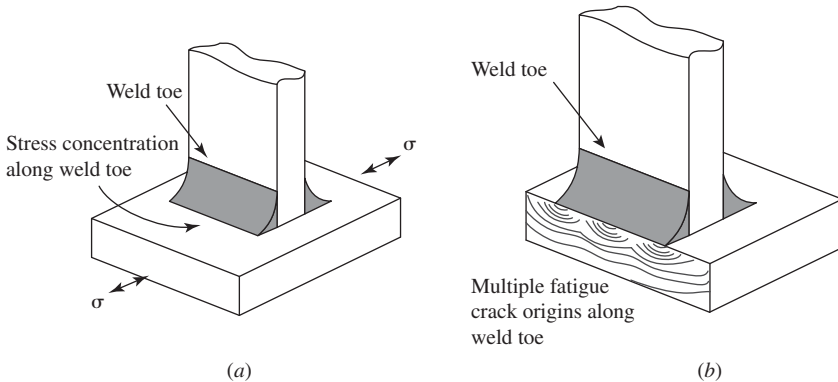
(a) Fillet weld with weld toes indicated. (b) Failure of a plate at nonload carrying transverse fillet welds. (After the Welding Institute, 1.)
